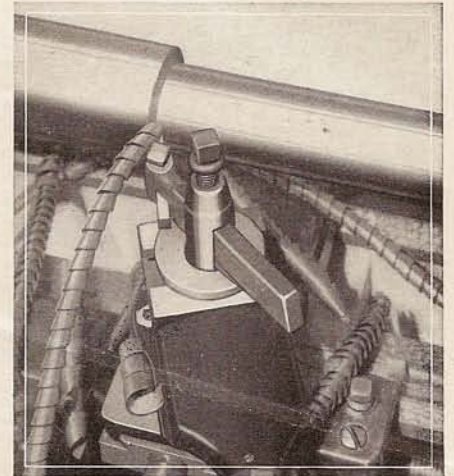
Close-up of Lathe Taking a Heavy Chip Shown in Fig. 116
